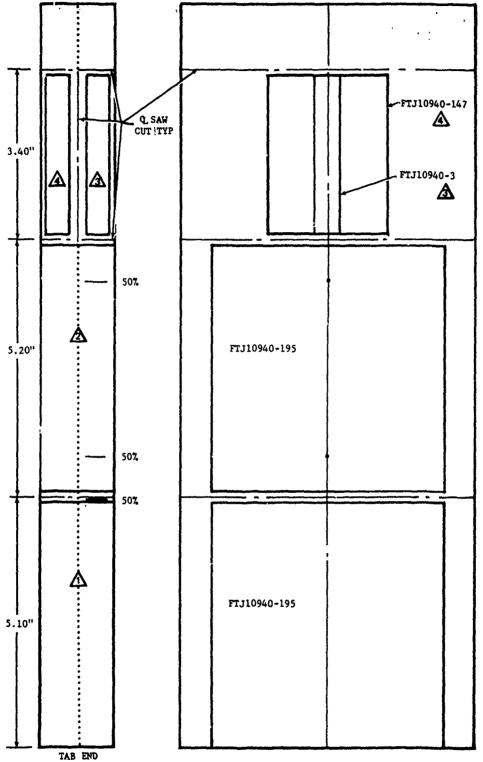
MATERIAL ALLOCATION FOR H92 PLATE ELECTRON BEAM WELD 2-68
